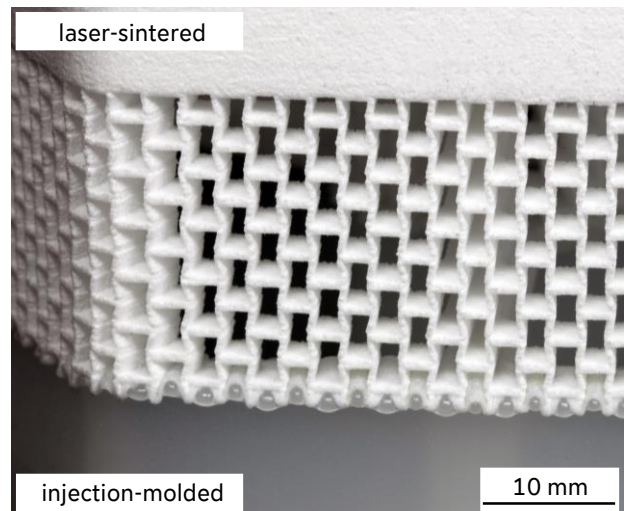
Weld joint between injection-molded component and individualized laser-sintered part
